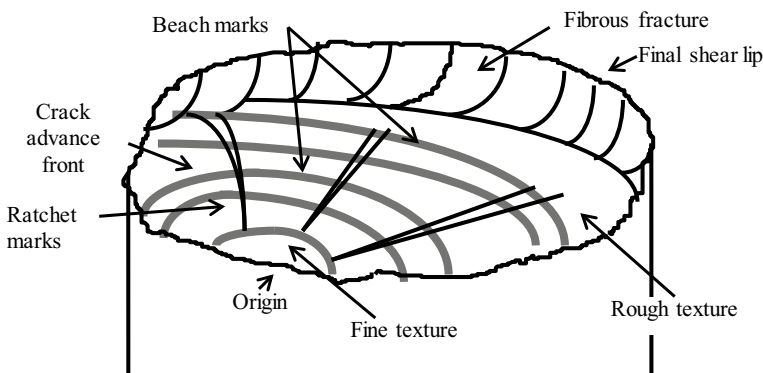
Scheme of a typical fracture surface by fatigue
